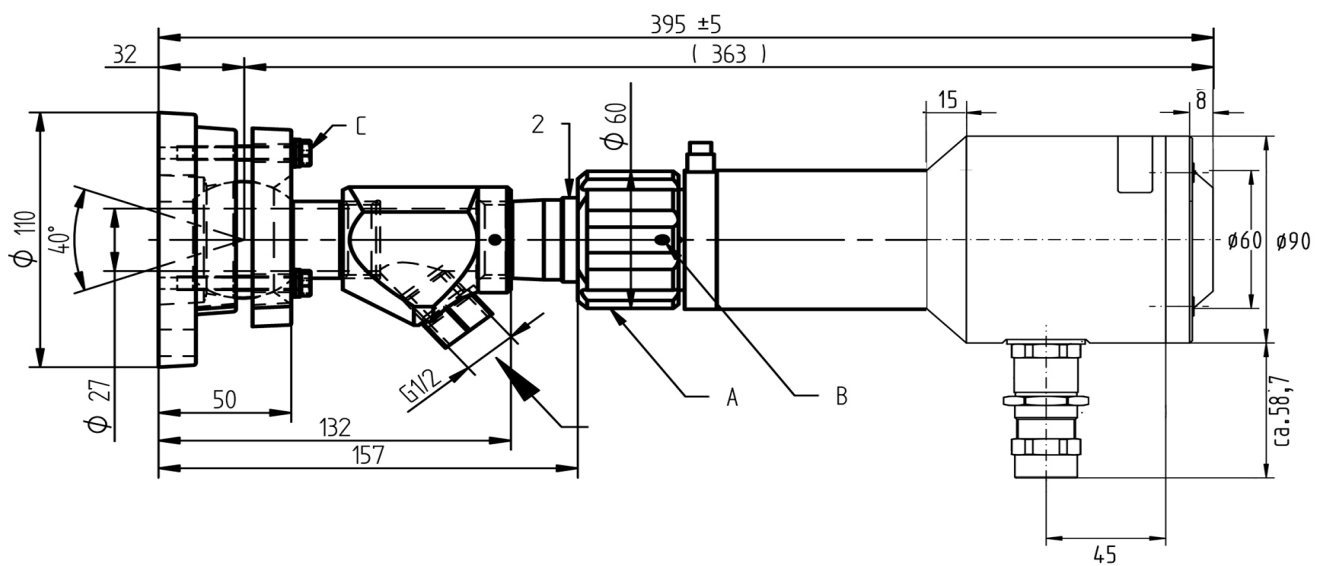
Dimensional drawing with bracket FV40-10 with F200K Ex type 659S1300
